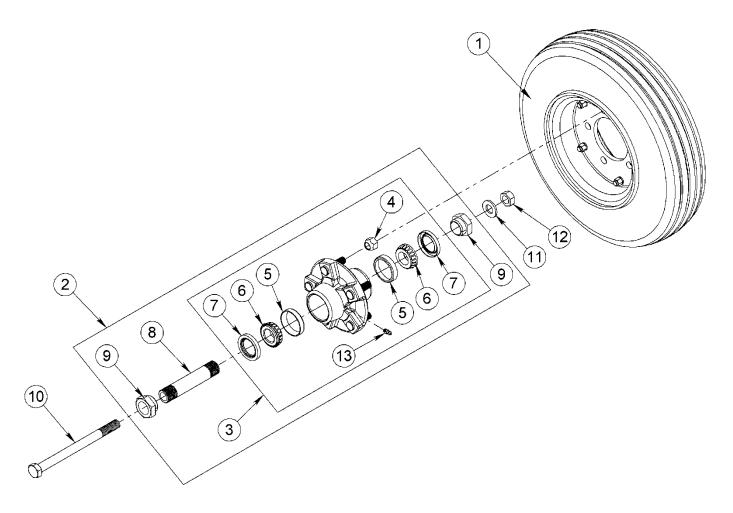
Pneumatic wheel Kit 5-Lug Hub
